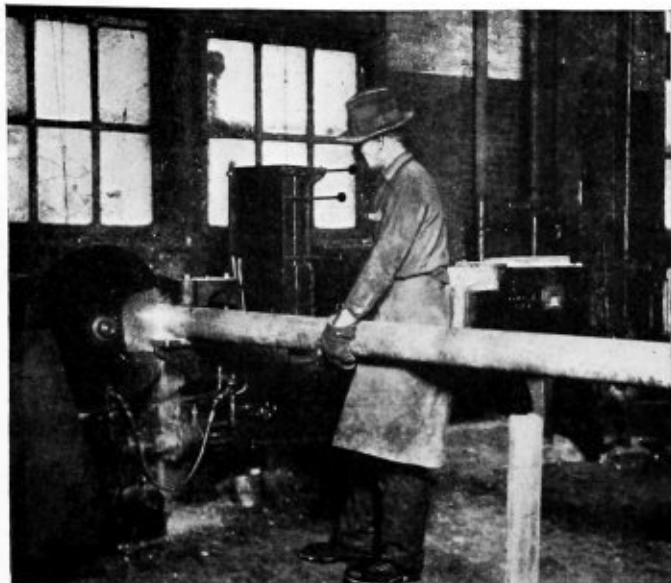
Machines for Safe Ending Superheater Flues Are Located So That the Operator Has to Move the Tube Only a Slight Distance to Complete All the Operations
